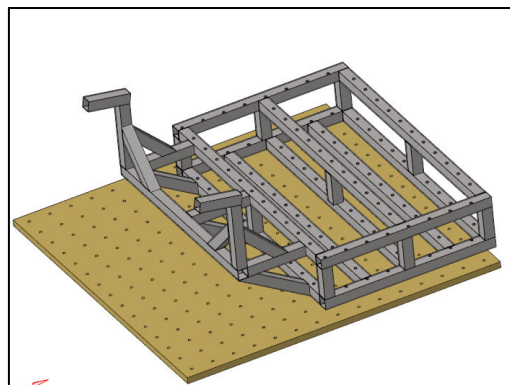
Base design of Holding Fixture with Vibrating plate (Header)
